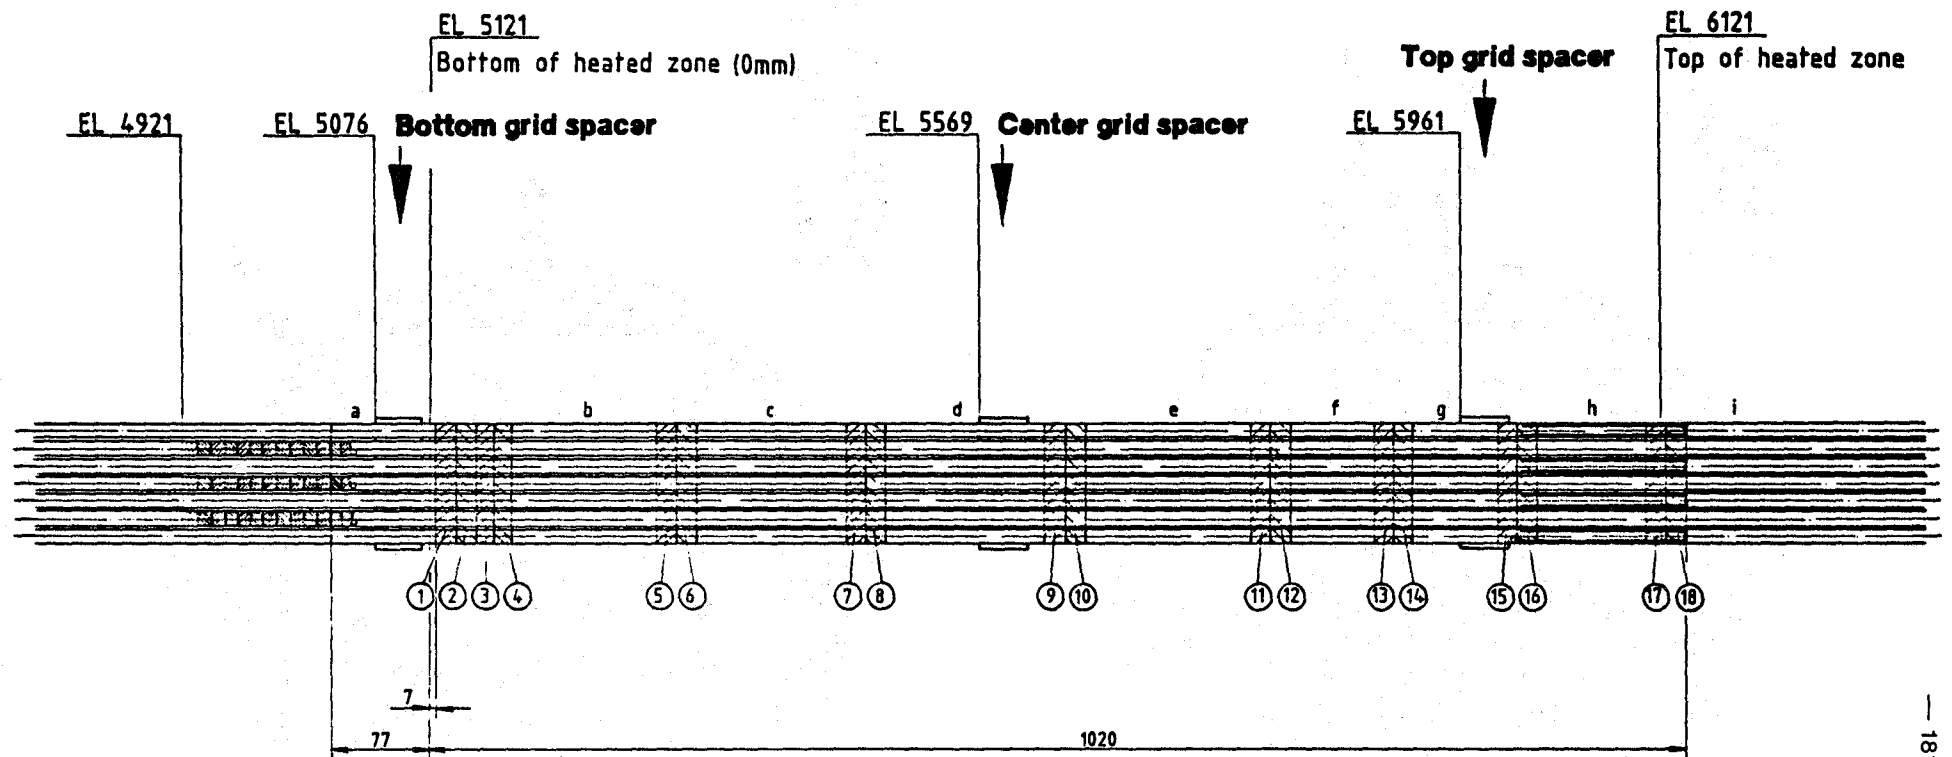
Cross sections of the test bundle CORA-2 at elevations indicated
